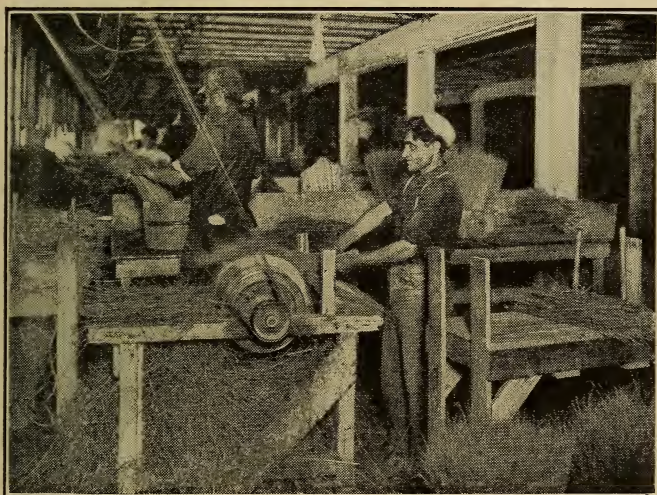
Employees combing out small pieces of broom corn which gives rise to much seed and dust
